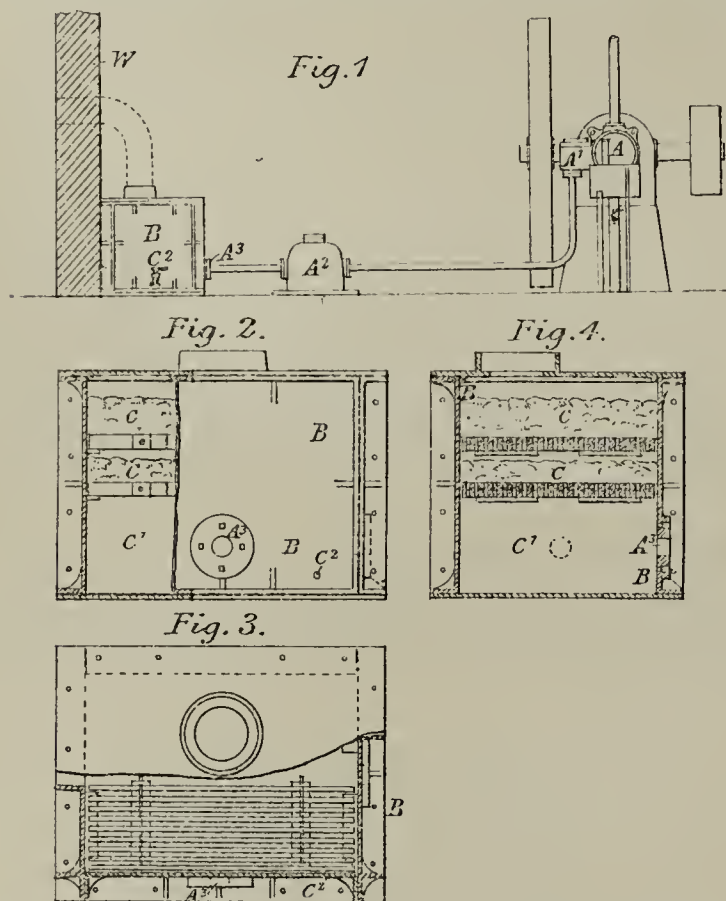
is an elevation of one arrangement of the complete appliances by which these improvements may be carried into practice; fig. 2 is a side view of one construction of the exhaust purifying vessel; fig. 3 is a plan view corresponding to fig. 2; and fig. 4 is a transverse section at right angles to fig. 2.
